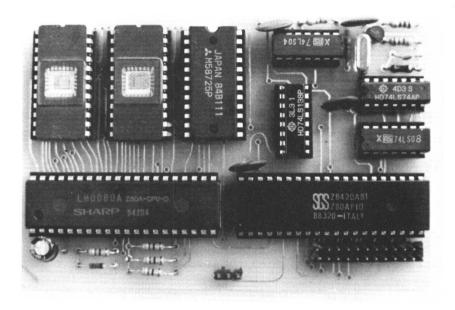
Single board controller (courtesy of J.P. Designs Ltd, Cambridge).
